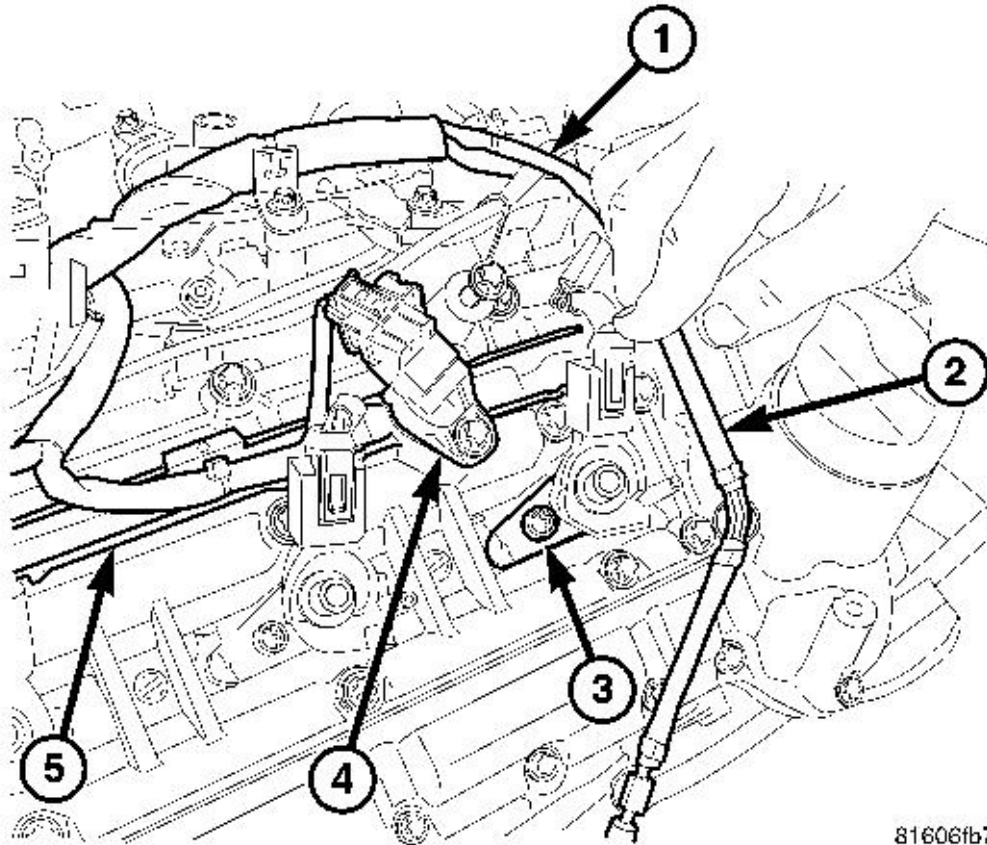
Identifying Oil Separator, Heater Hose With Bracket
